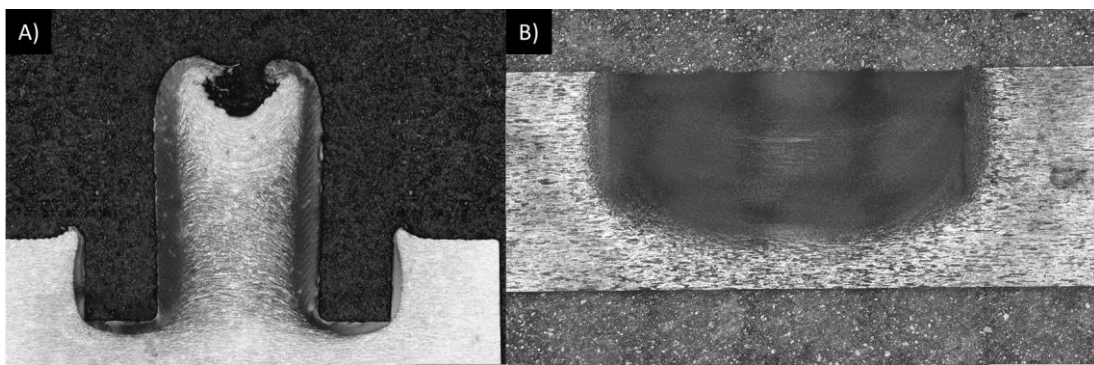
Cross-section of RFSSW weld A) mid-process and B) a completed weldment.
